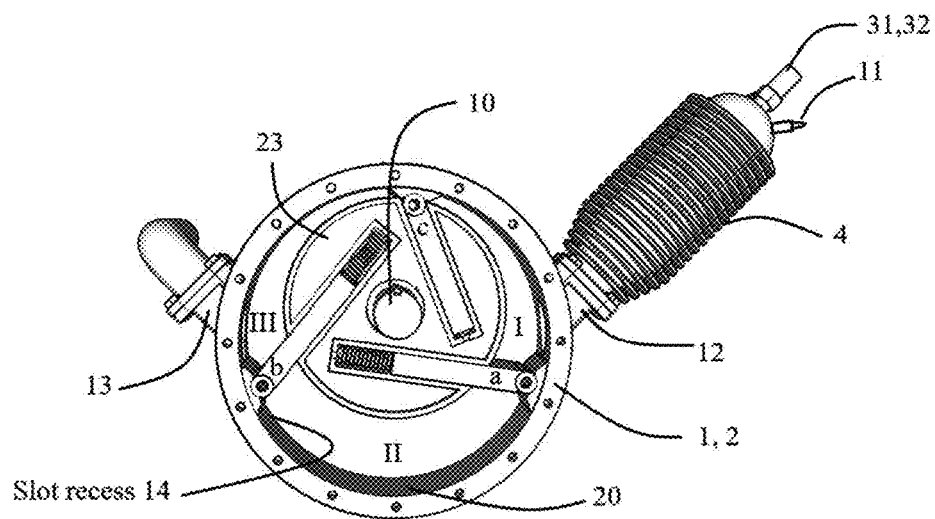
Vane rotary type motor, engine operation view with three vanes.
